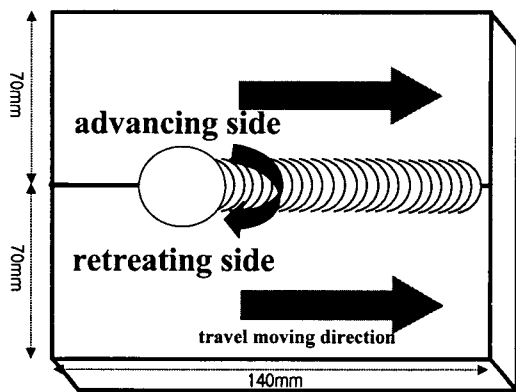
Schematic illustration of each weld side and welding process.
